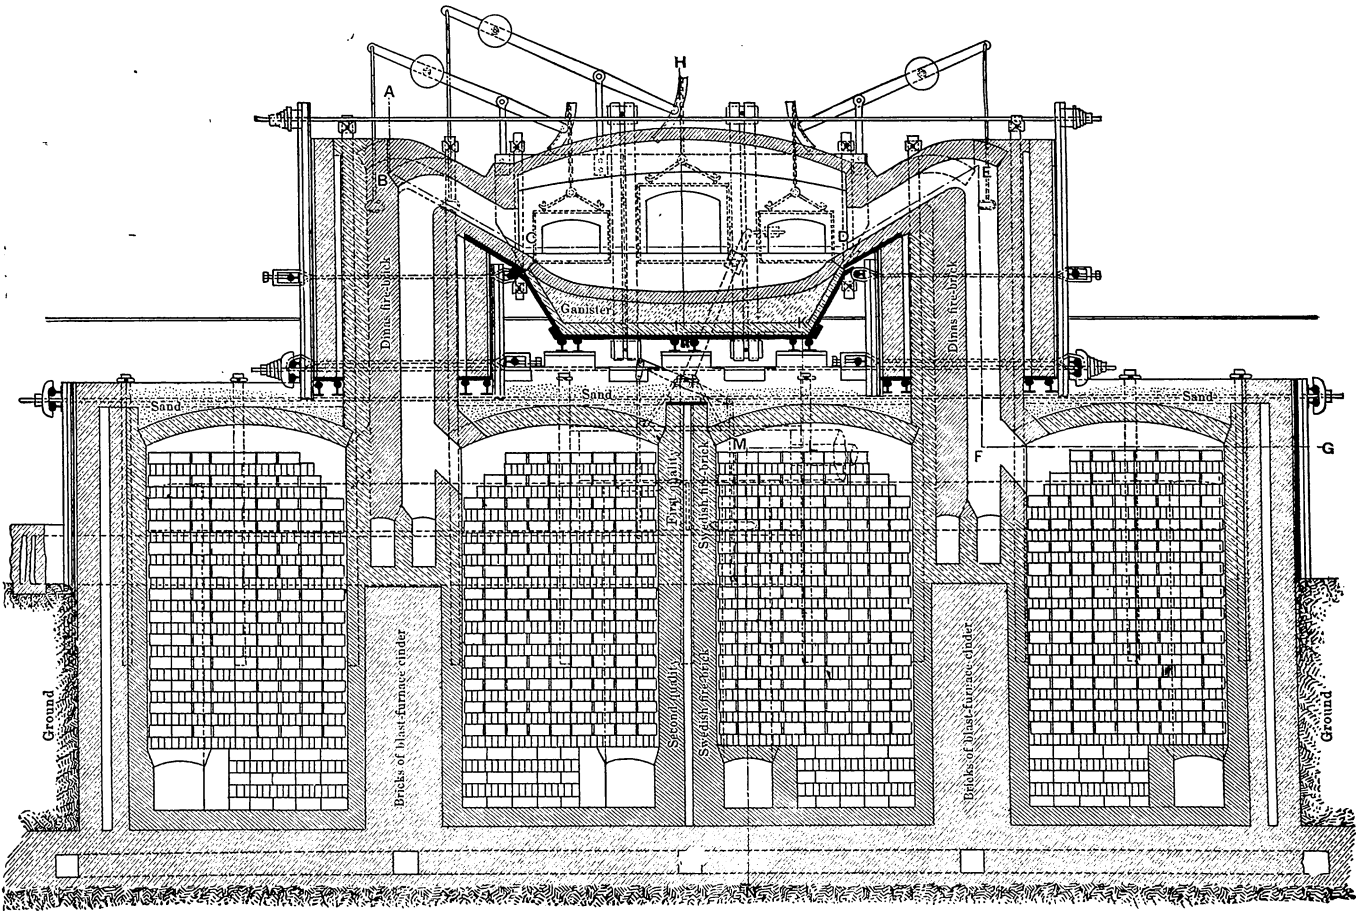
Open Hearth Furnace.—Section O P Q R.
